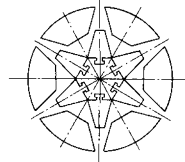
and 2 Mold for a cylindrical container with a reduced-diameter opening
